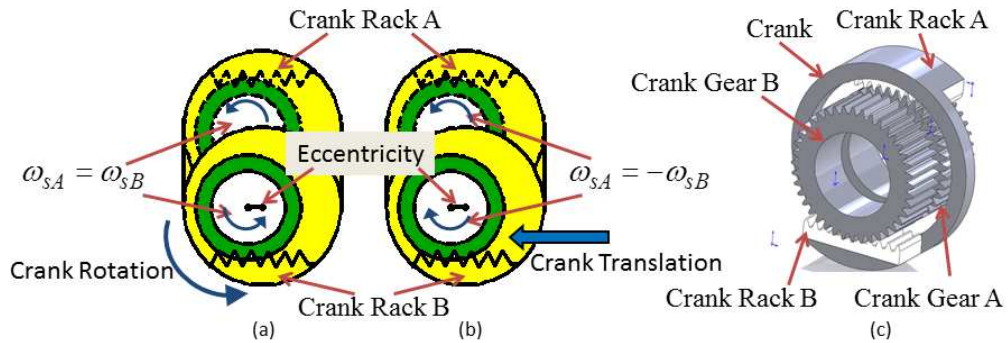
Schematic of the crank motion when (a) the control speed is zero or (b) the input speed is zero; (c) the 3D model of the crank and crank gears
